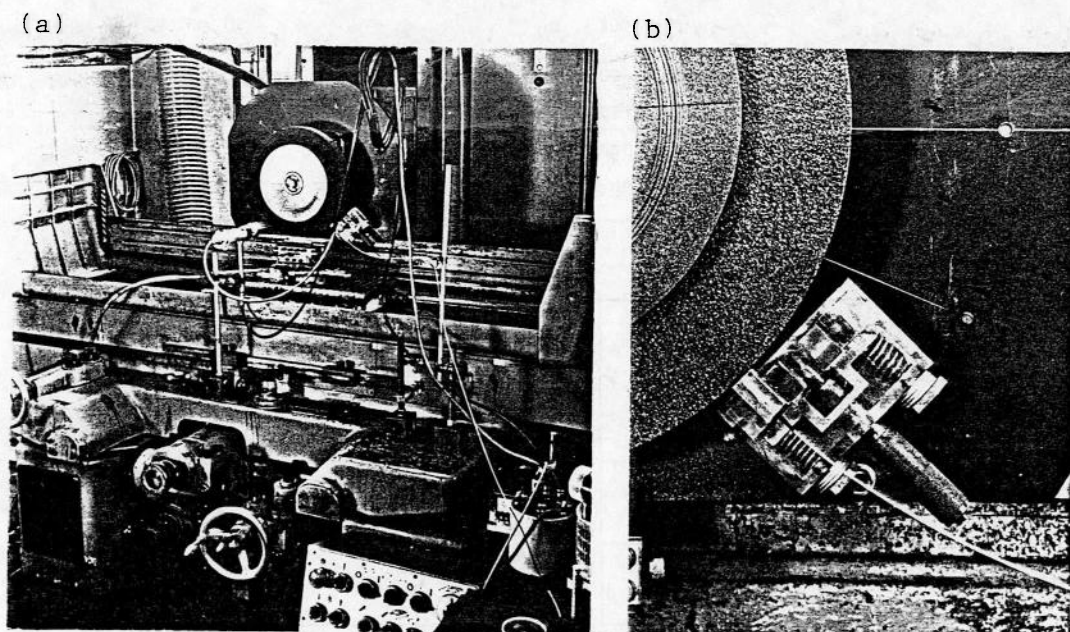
Photographs of experimental apparatus; (a) surface grinding machine, (b) fiber holder with micrometer.
